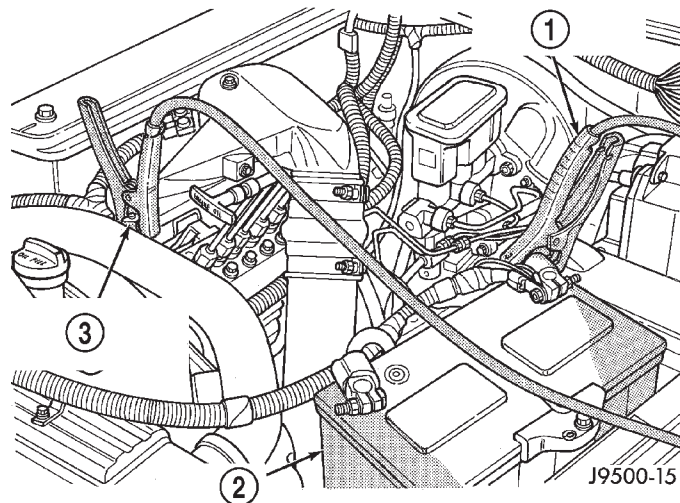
Jumper Cable Clamp Connections—Diesel Engine
